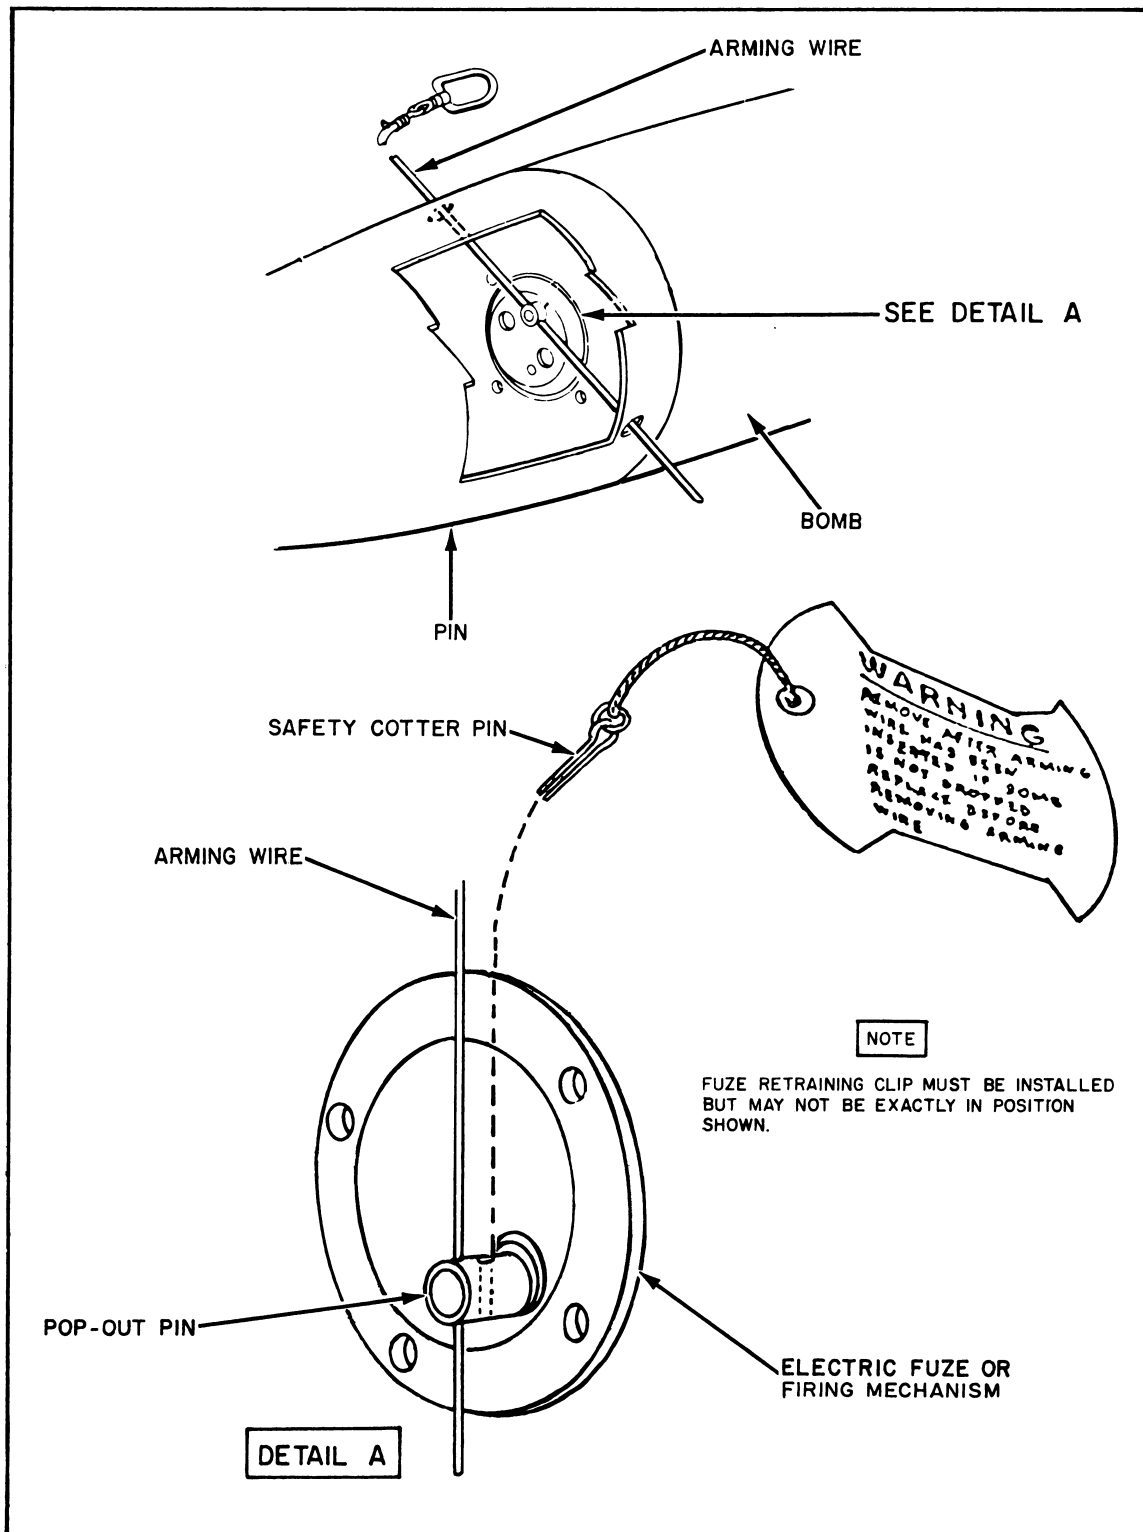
Typical electric fuze/firing mechanism installation.
